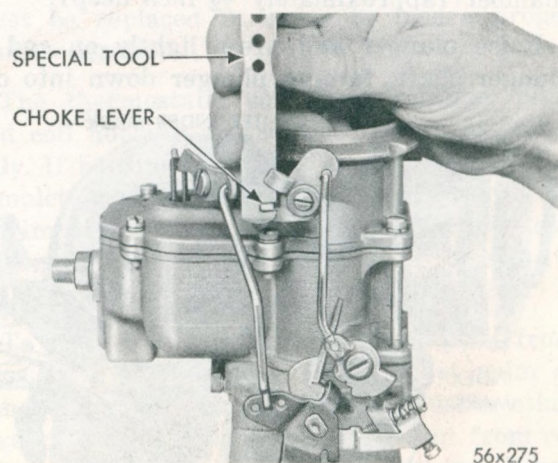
Bending Choke Lever for Correct Fast Idle Cam Setting
